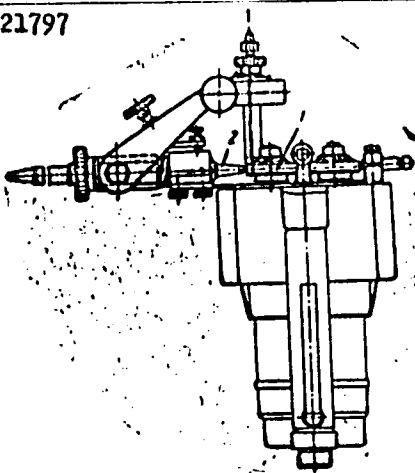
1 - positioning rollers; 2 - protecting chamber
